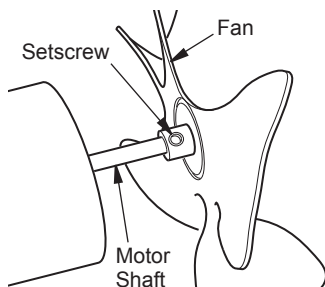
Fan, Motor Shaft, and Setscrew Location
